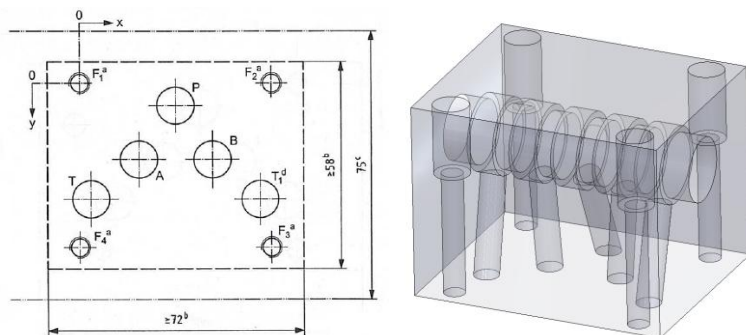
Standard configuration of the bottom side of the hydraulic valve according to ISO 4401 size 10, and CAD model of a conventionally manufacturable hydraulic valve of the same size.
